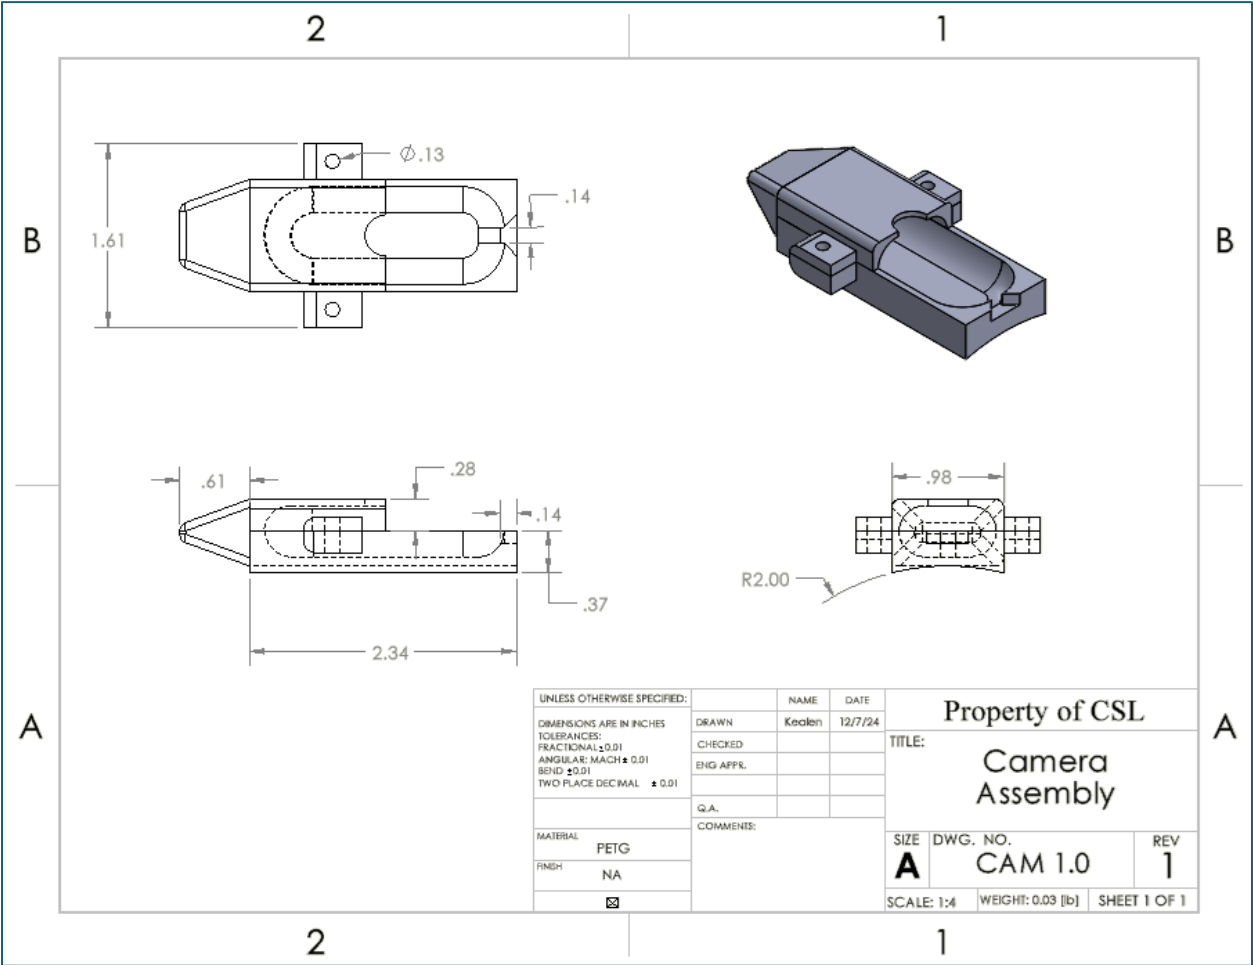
SolidWorks drawing of the Camera Assembly with critical dimensions.
